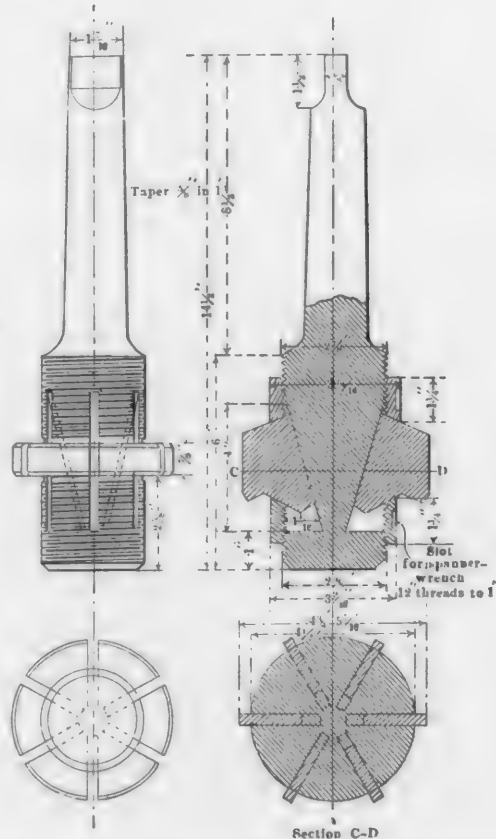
EXPANDING REAMER FOR ROD BUSHINGS.
